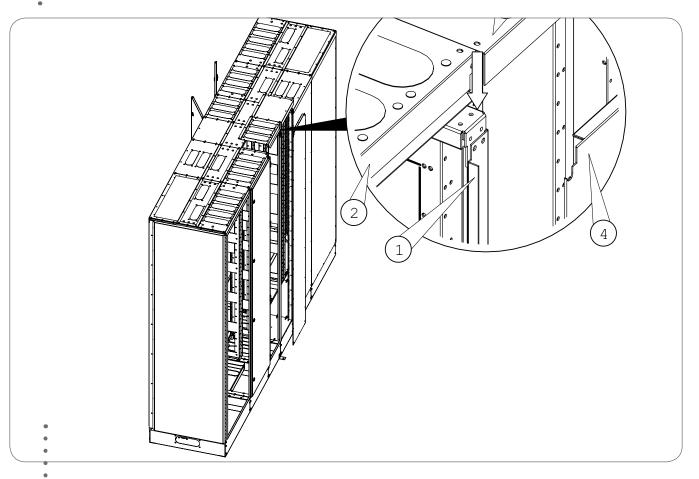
b) Roof and back plates are added to the structure after installing the change-over back profile.
